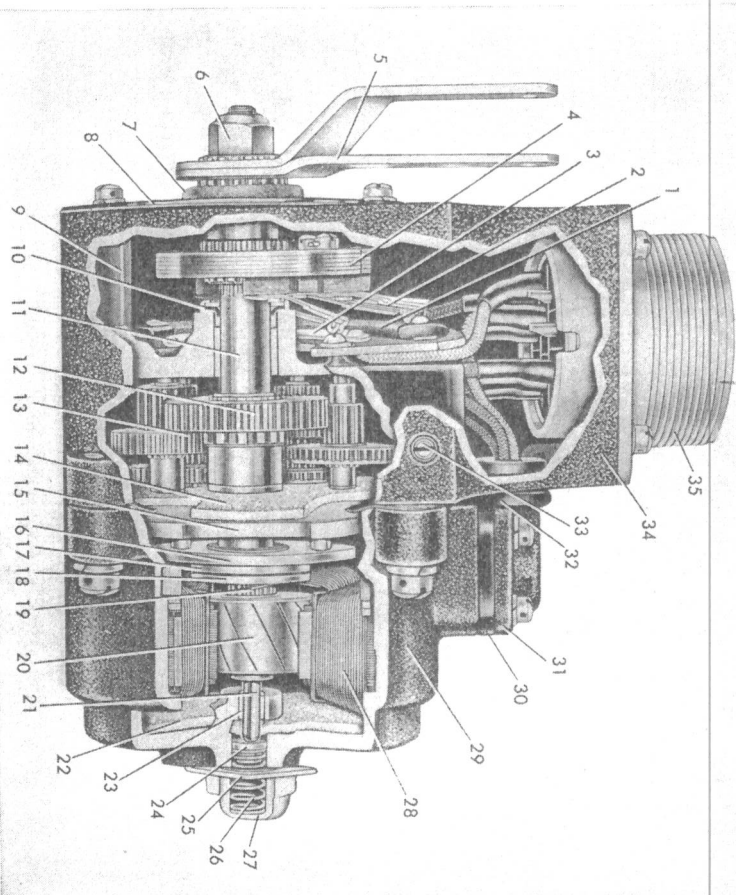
A cutaway view of the waste-gate motor. (1) Potentiometer winding; (2) potentiometer wiper; (3) collector strip; (4) stop plate; (5) crank arm; (6) castellated nut; (7) dust washer; (8) cover plate; (9) mechanical stop; (10) Neoprene oil seal; (11) output shaft; (12) bull gear; (13) gear train; (14) felt oiler; (15) armature-assembly mounting plate; (16) brake plate; (17) brake disk; (18) clutch disk; (19) thrust spring; (20) armature; (21) armature shaft; (22) felt oiler; (23) sleeve bearing; (24) thrust spring; (25) brake-spring lock washer; (26) brake spring; (27) brake-spring cap; (28) stator coil; (29) oil housing; (30) terminal block; (31) terminal block cover; (32) rubber grommet; (33) oil plug; (34) gear housing; (35) connector. (Courtesy Minneapolis-Honeywell Regulator Company)
